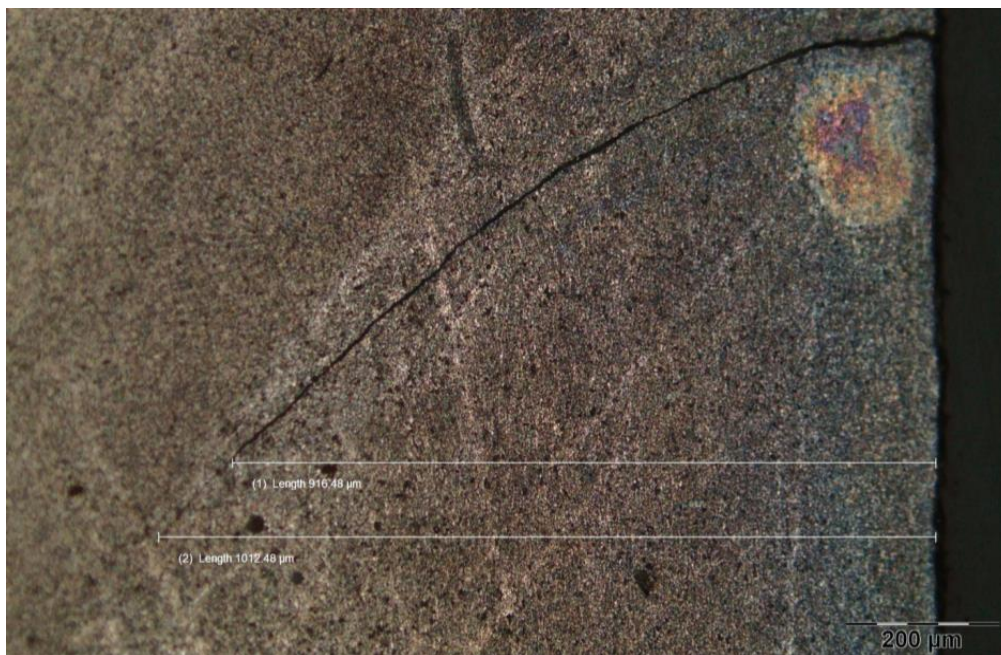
Size of Lack of Penetration within various Offset Tool Friction Stir Welded Joints
